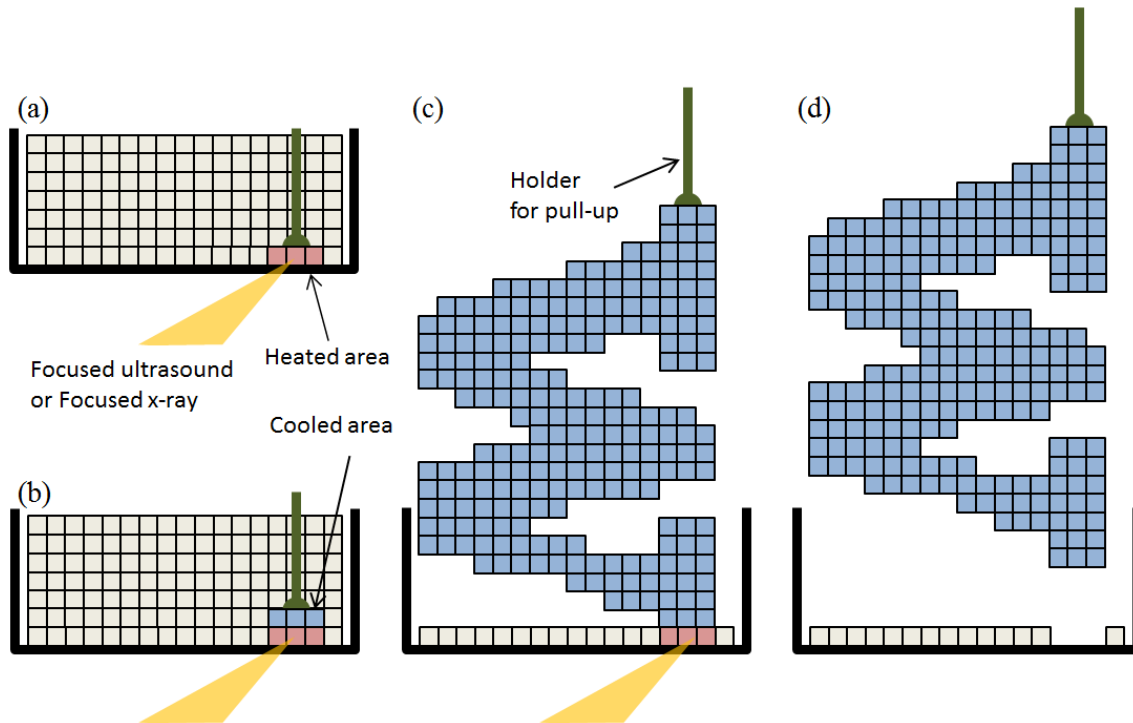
A 3D printing scheme for “W” shaped structure. (a) First layer writing. (b) Pull-up and cooling the first layer and second layer writing. (c) Final layer writing. (d) Completed structure.
